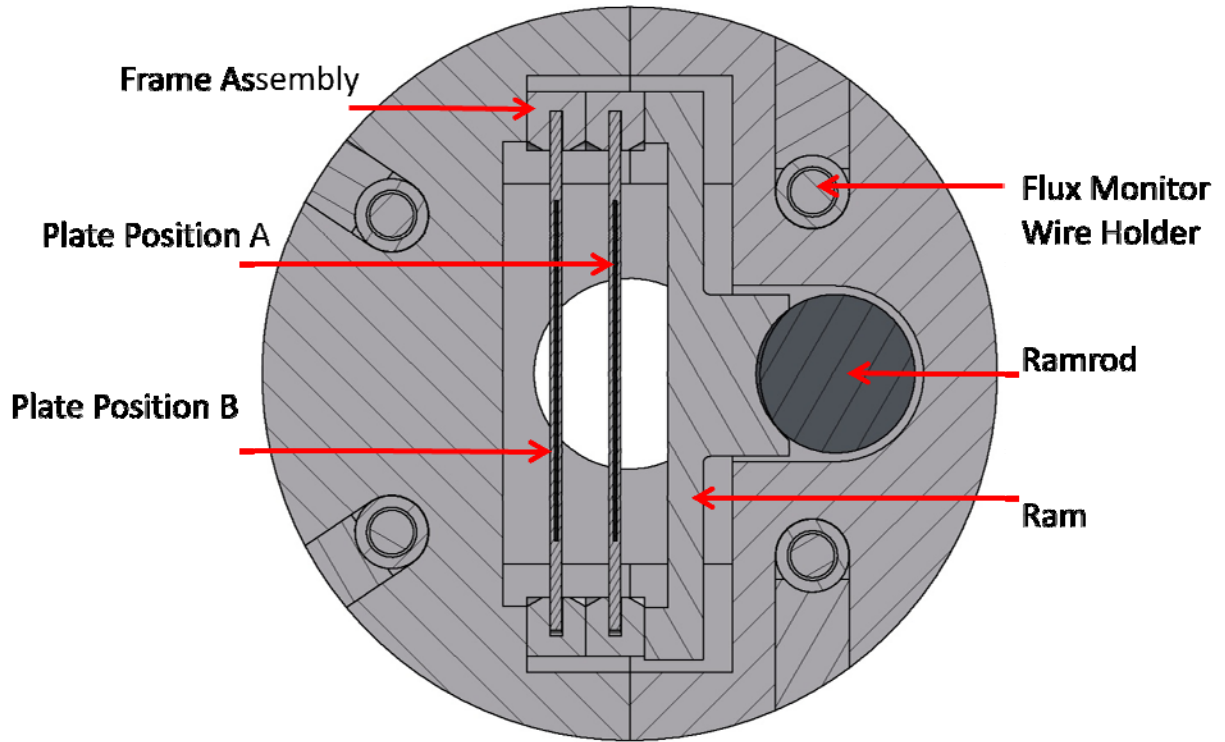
Radial Cross Section of the AFIP Test Train Assembly.
